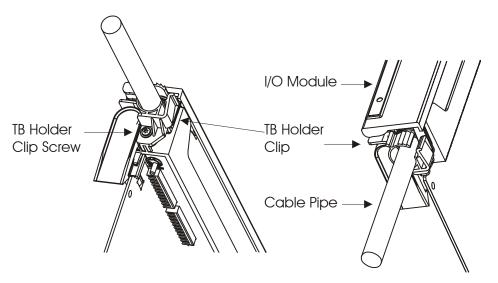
I/O Module with Terminal Block (TB) Holder Clip
